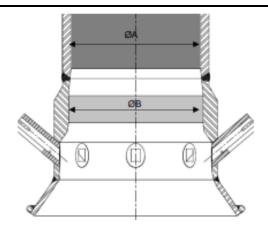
TSUDL's inner diameter to be inspected with the Dimensional Gauge
